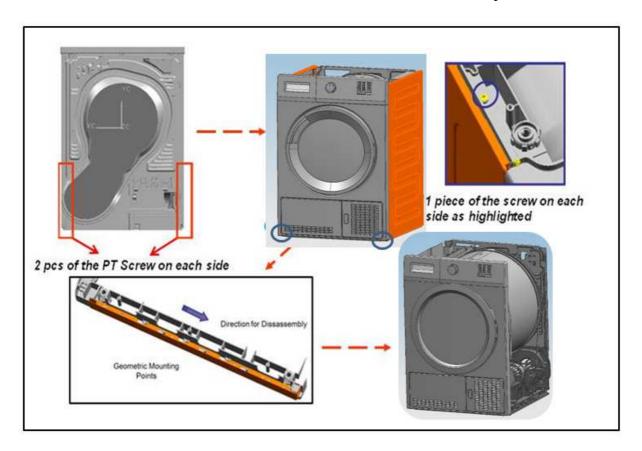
Connections between the side panel and the plastic chassis assembly
